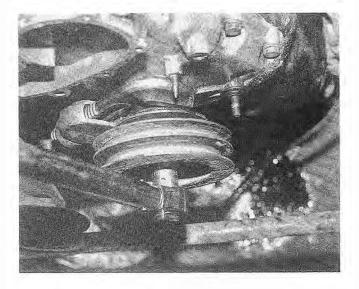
Vibration damper secured with wrench while mounting nut is loosened.
